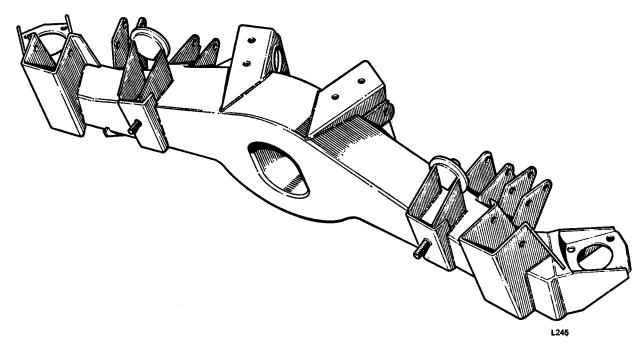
VIEW OF REAR SUSPENSION CROSS-MEMBER
